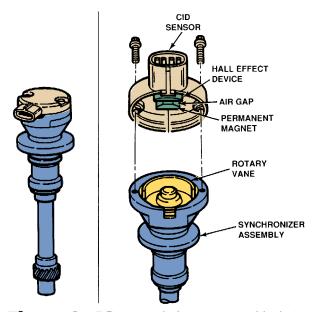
A camshaft sensor assembly designed to fit into the distributor bore. *Courtesy of Ford Motor Company
